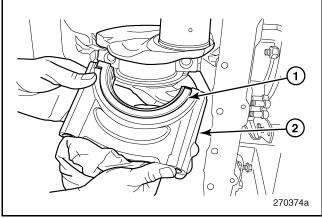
Crankshaft No. 4 Main Bearing Cap with Thrust Washers
